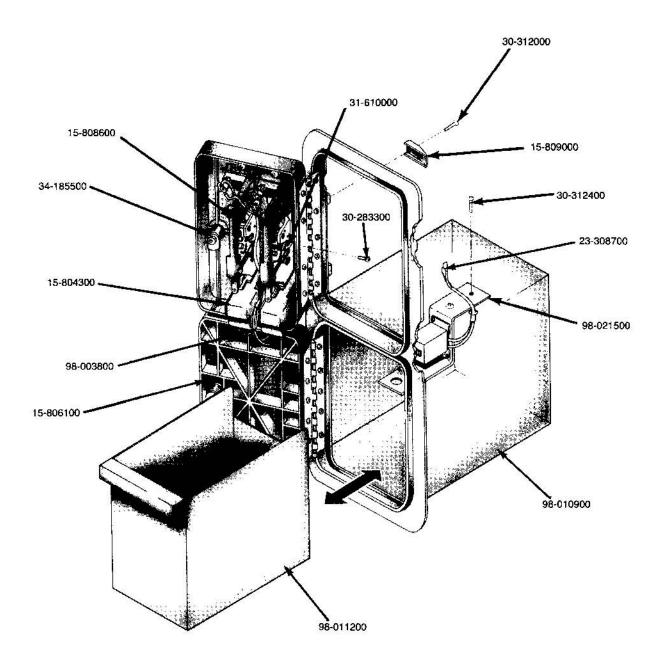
Speaker Box Assembly (000-8005-10-0A)
